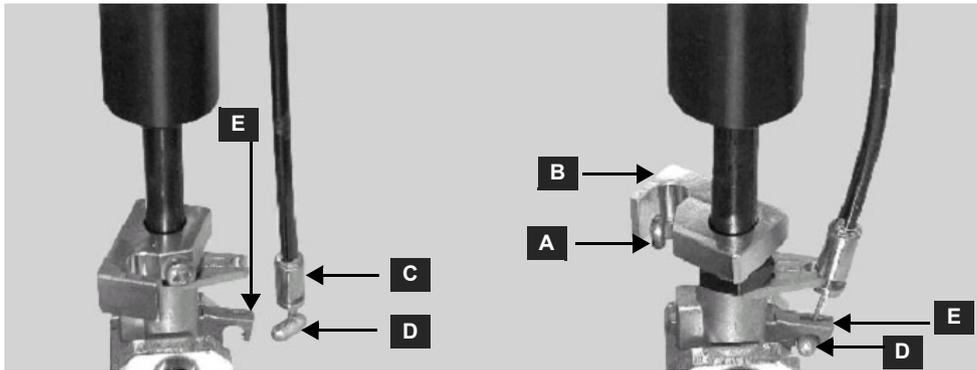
Gas Spring Rod and Cable Holder - Close-up Views
